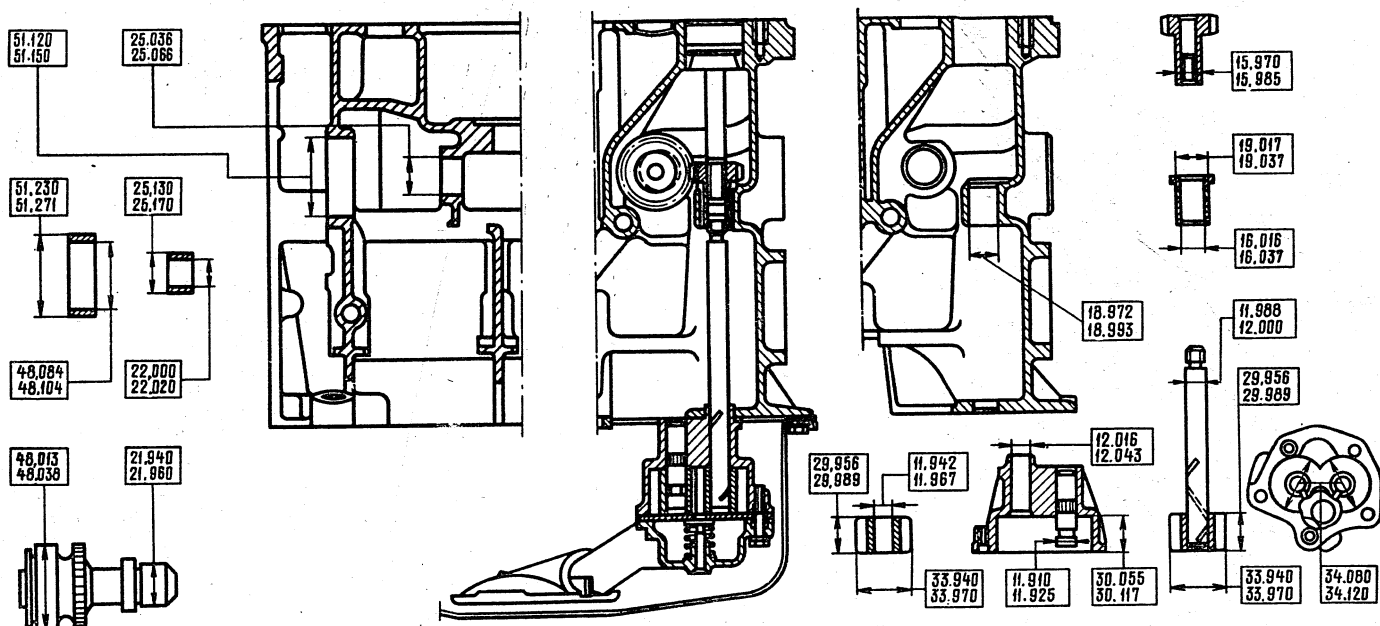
Basic Dimensions of Oil Pump and Drive
